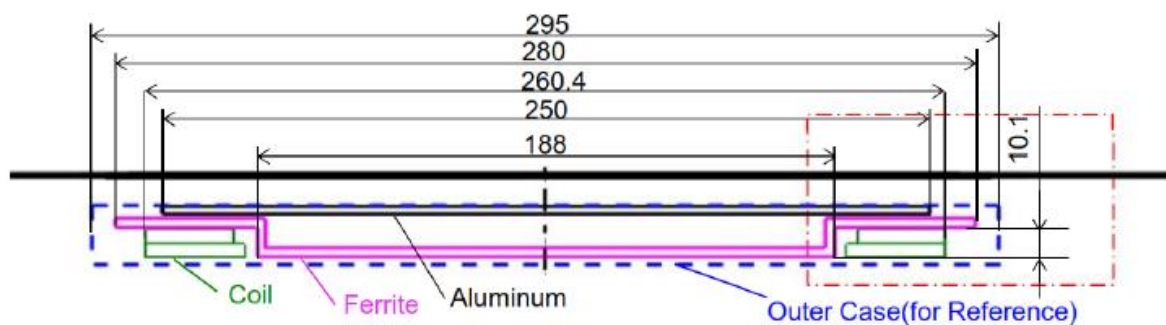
Mechanical dimensions of the M-VA- WPT1/Z1
